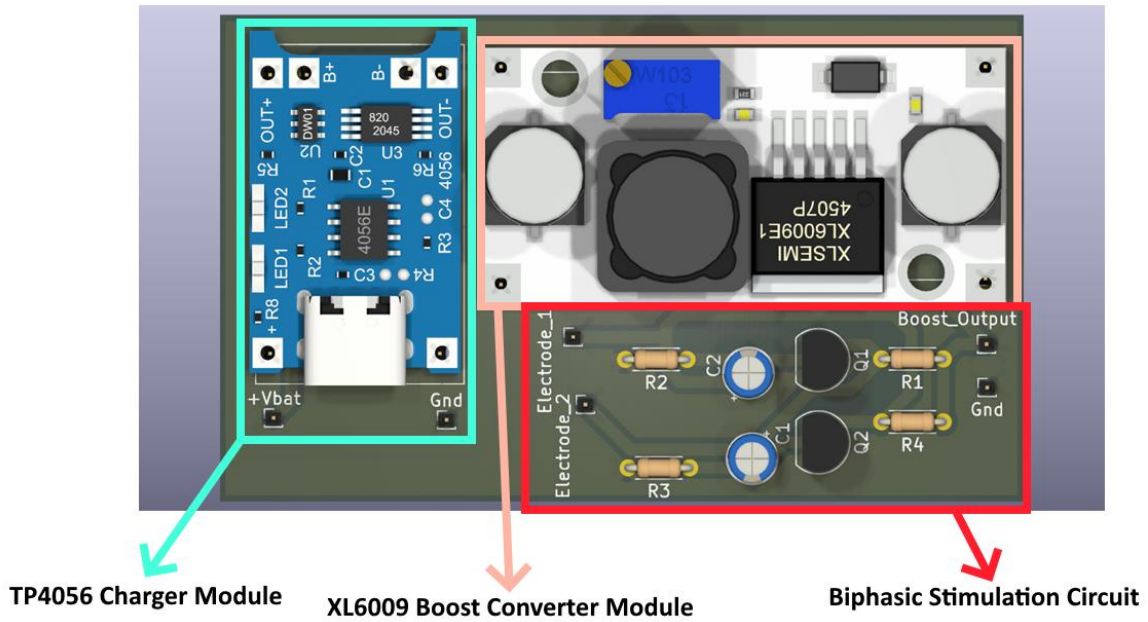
Single-Layer PCB Layout designed for Fabrication of Final IRF540N Astable Multivibrator.
